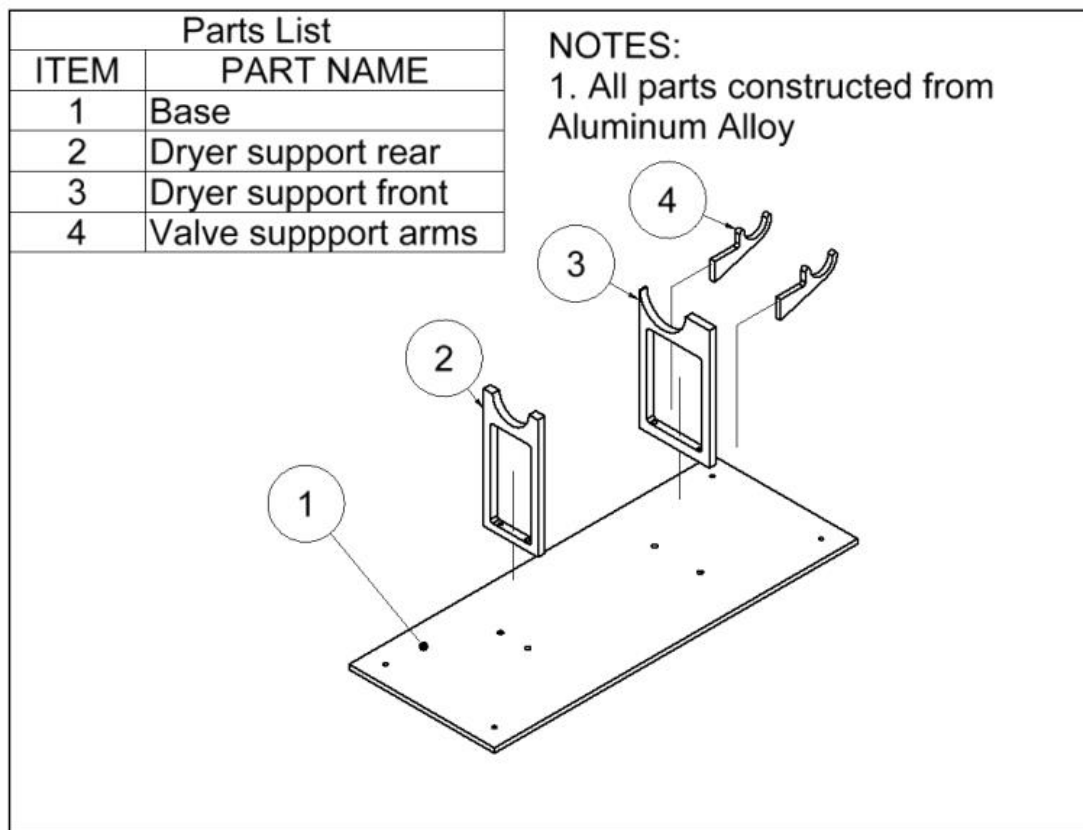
Support stand (DADD component 6): comprising base (1), dryer support rear (2), dryer support front (3), and valve support arms (4)
